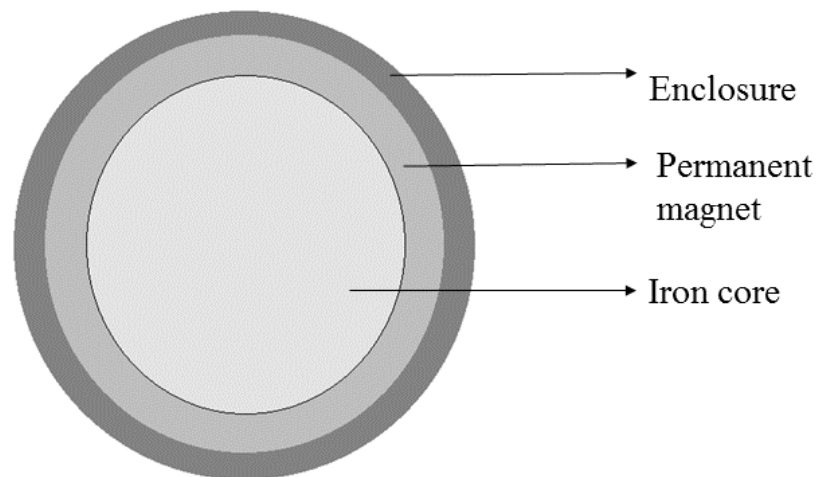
Continuous cylindrical permanent magnet showing the three shrink fitted components
